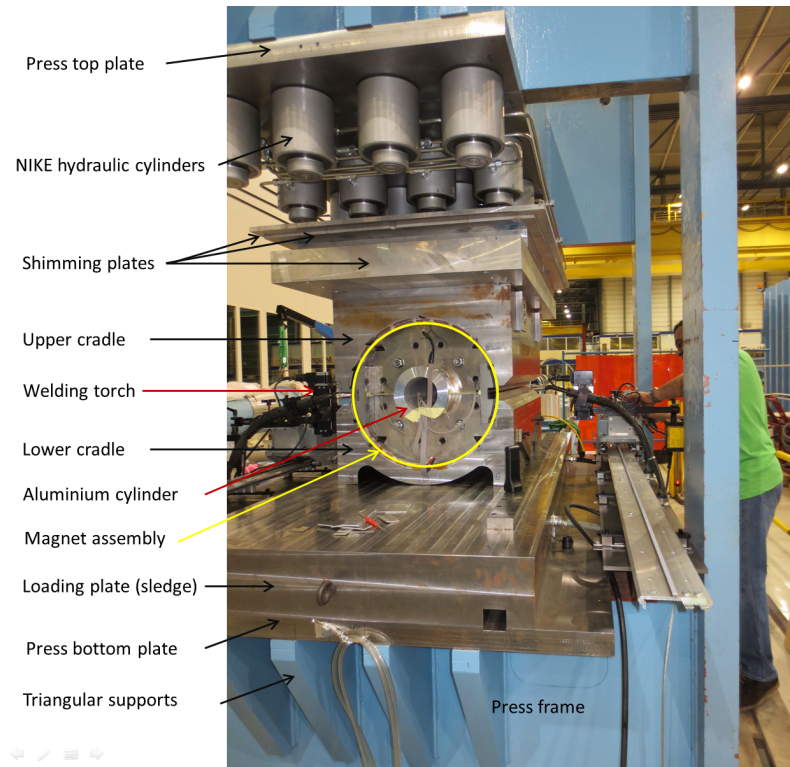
The improved press with a dummy dipole magnet assembly to be welded under the press load. The coil has been replaced by the aluminium cylinder. [24]
